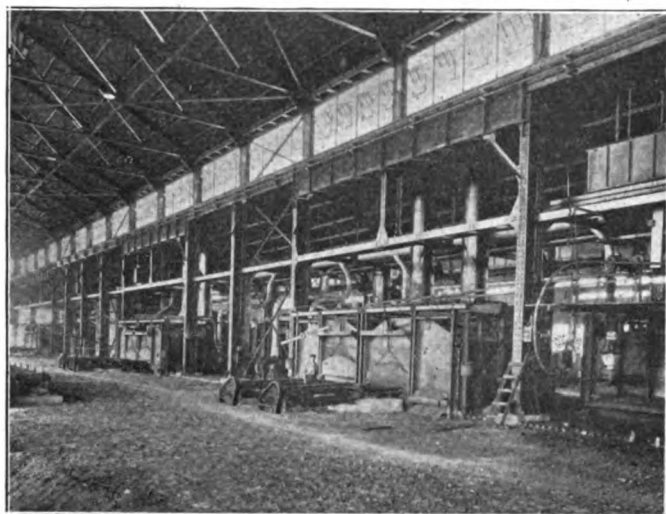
General view of sheet and pair furnaces, mill side—in mill building.
